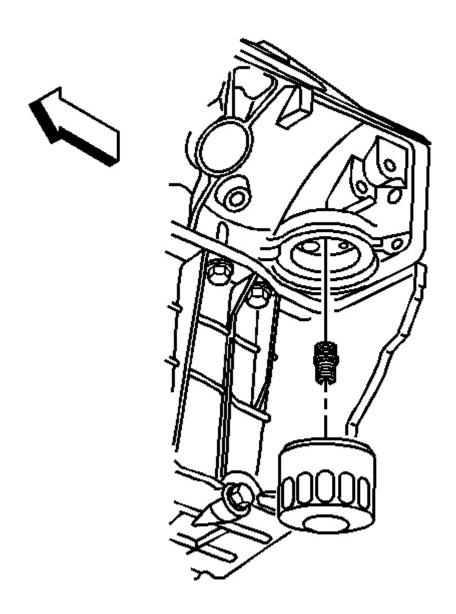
View Of Oil Filter & Adapter Courtesy of GENERAL MOTORS CORP.
